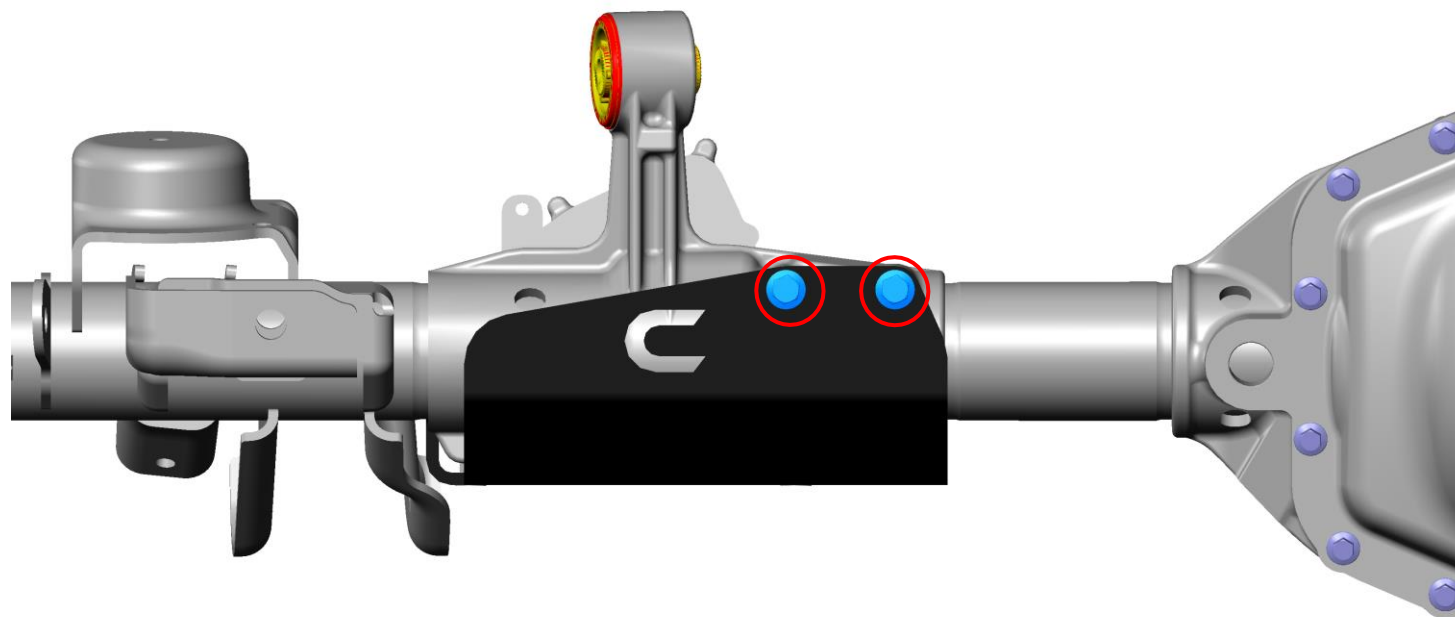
Factory skid plate bolts installed on new FAD skid plate (front)
